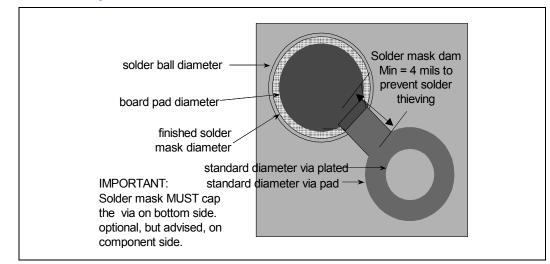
Via-Pad Layout Metal-Defined Pads
